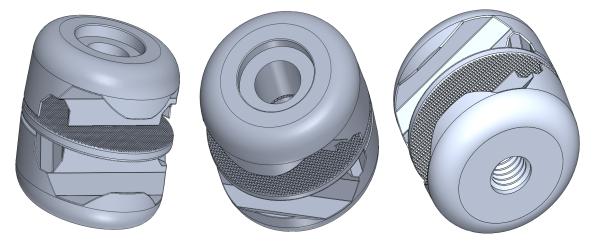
Second clamp concept; a) Isometric view, b) Top view, c) Bottom view
